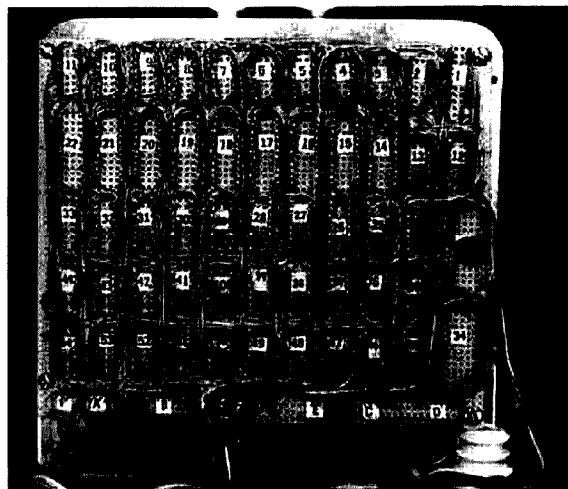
Photo C. Main circuit board showing wire-wrap. The numbers indicate ICs. Parts are mounted on DIP headers. Letters indicate sockets for interconnecting cables.
